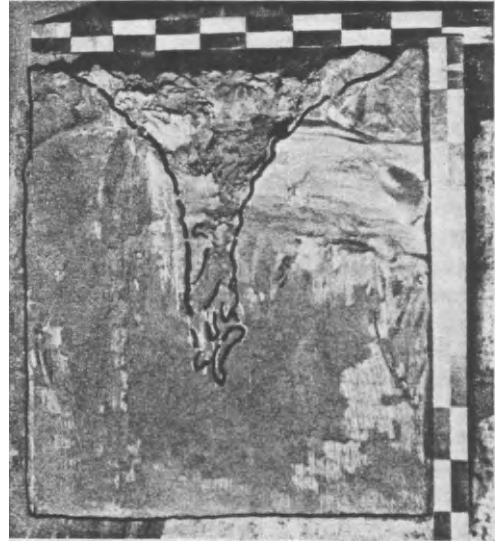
Conical shape of shrinkage cavity in a cast steel cylindrical feeder head 900 \varnothing \times 900 H.
